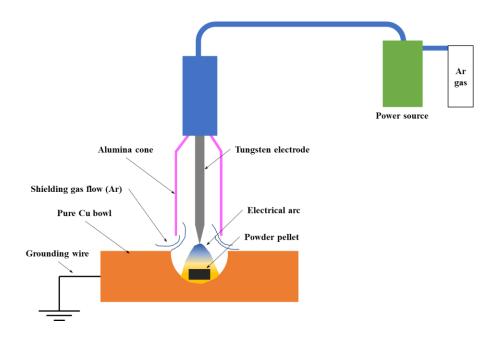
Schematic of ODS master alloy manufacturing by arc melting using a TIG welding torch.
